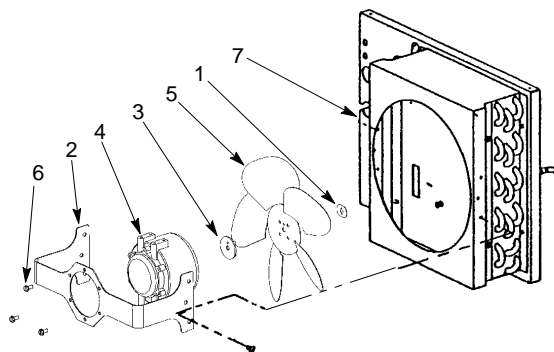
CONDENSER MOTOR ASSEMBLY
